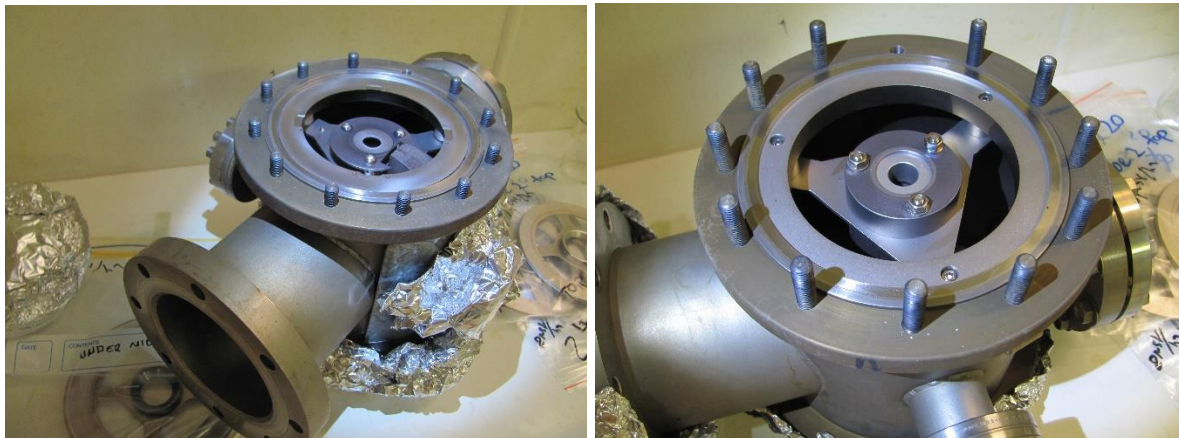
HE stripper assembly Top (left) and Bottom (right)
